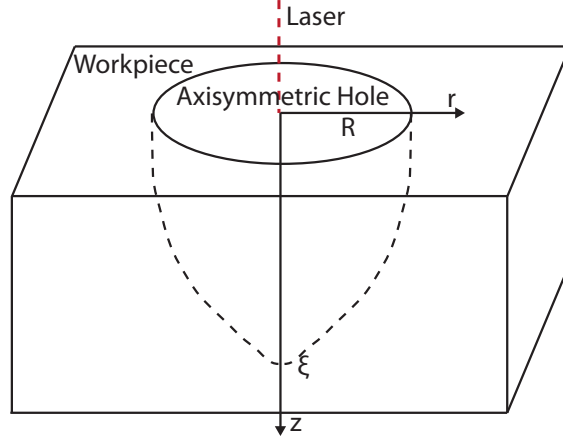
Three-dimensional representation of the workpiece and hole. Radius of hole at surface is given by R and hole depth is given by ξ .
